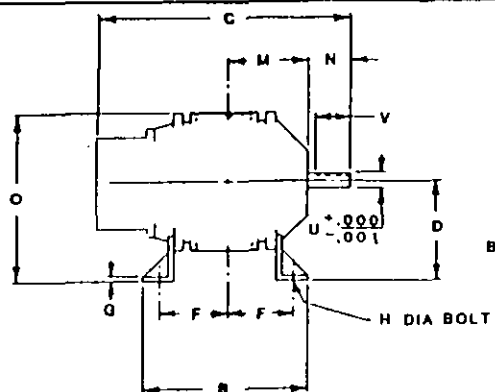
Dimensional Assembly of UNIVERSAL RAI® Blower (6" & 7")
